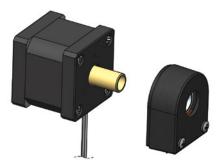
Installation of an encoder onto an encoder-ready motor with the required protruding shaft and mounting surfaces.
